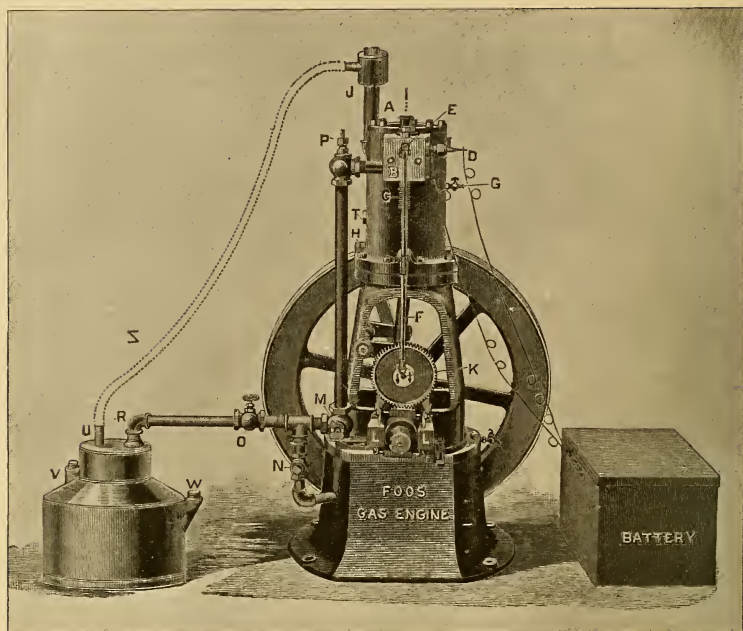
THE FOOS ENGINE. BUILT BY THE FOOS GAS ENGINE CO., SPRINGFIELD, OHIO.
